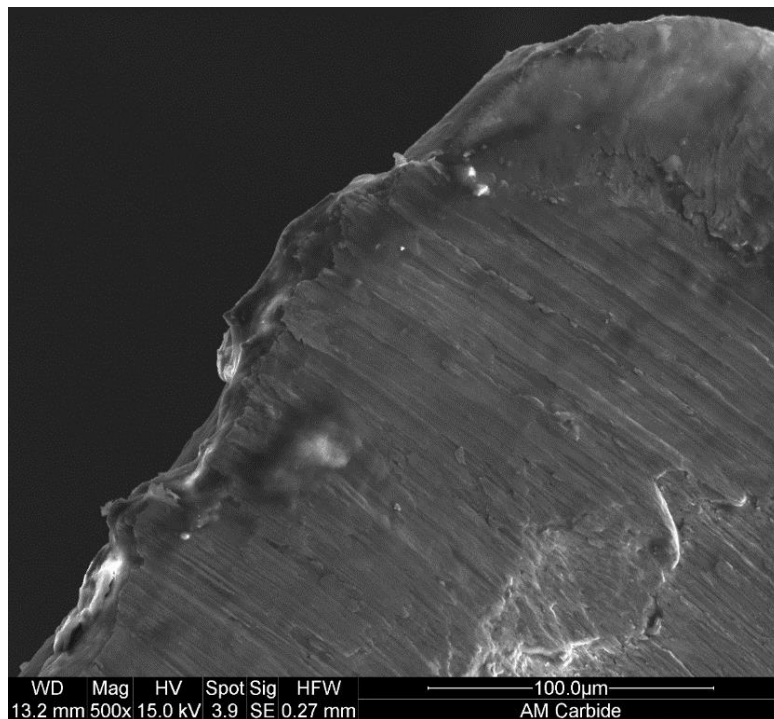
500x SEM top down view of the carbide drill bit cutting edge after drilling 60 holes in AM titanium.
